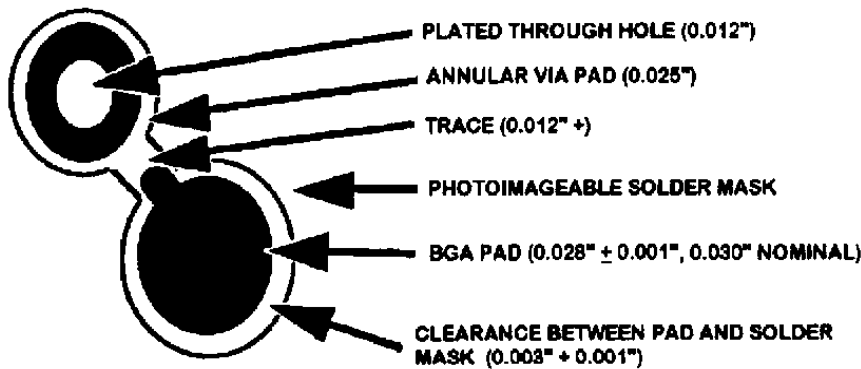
EXAMPLE OF 1.27MM CBGA NSMD PAD
